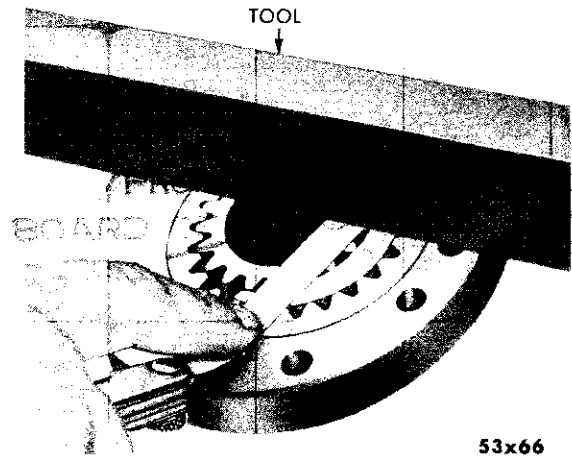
Checking Clearance between Rear Pump Body and Gears
